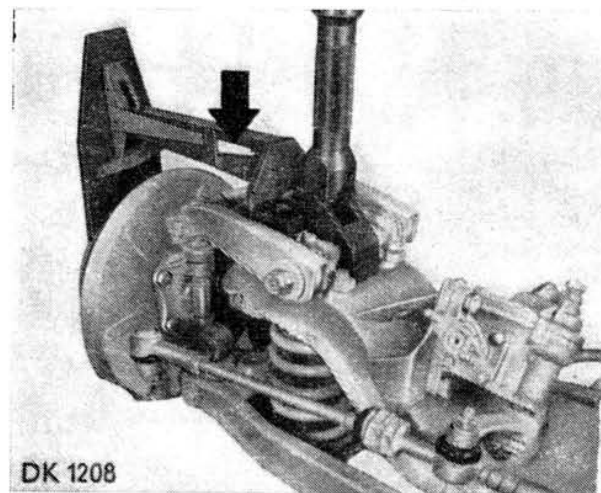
/8 - Checking Camber Angle Using MP 6-123 or MP 6-139 Gauge (with compressed road spring as per par. 18)
